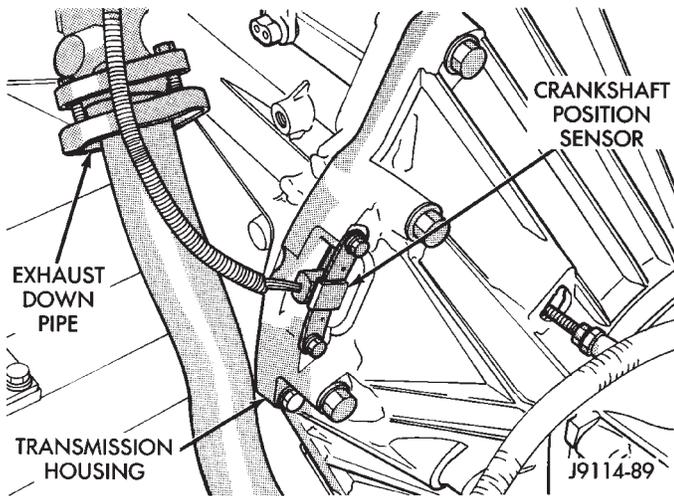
Crankshaft Position Sensor—2.5L Engine—Typical
